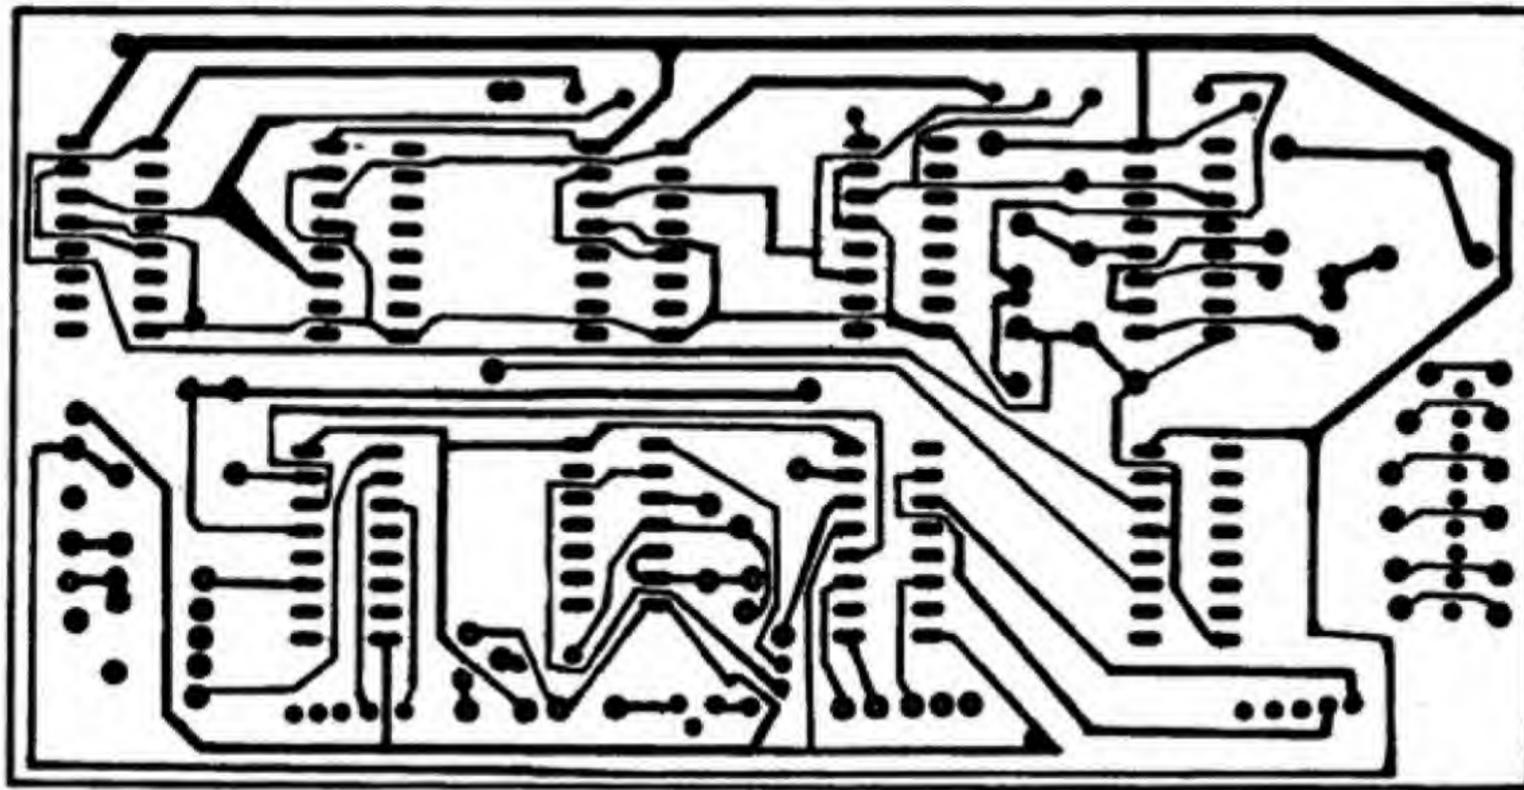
Solder side PCB layout for the circuit shown in Fig. 2.
